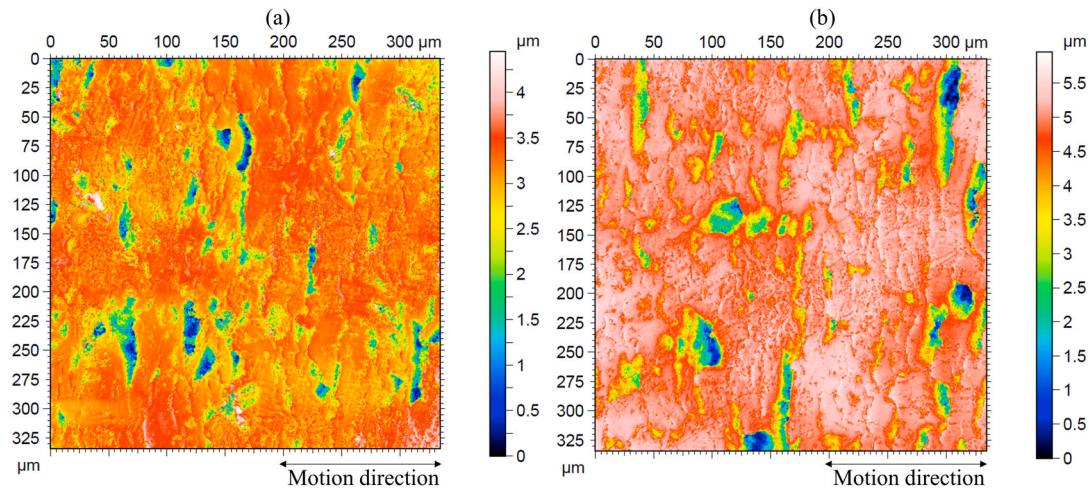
Top view images of the gear surfaces with the lowest (a) and the highest (b) severity of damage from the micropitting failure mode.
